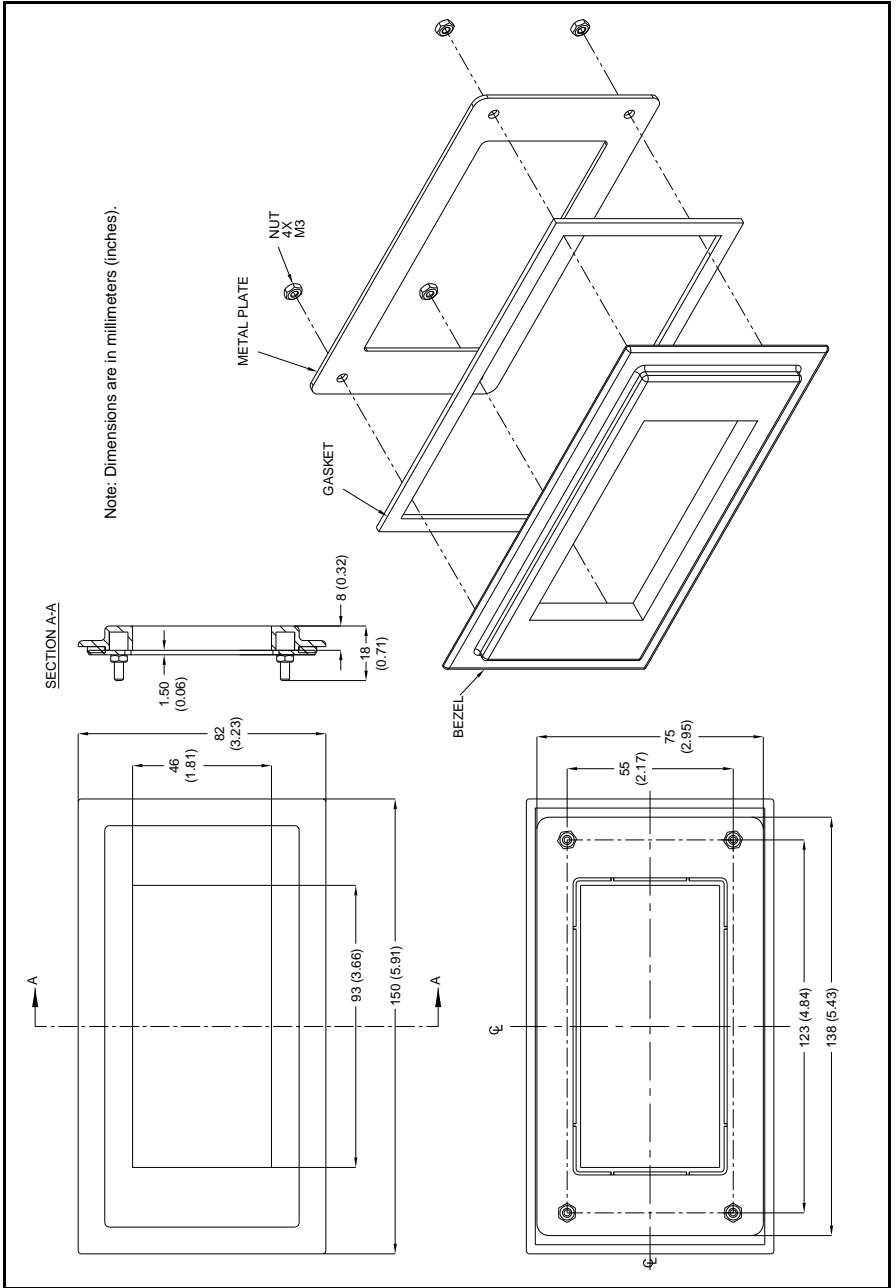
Optional Adapter Plates (ref. dwg #705-1297)
